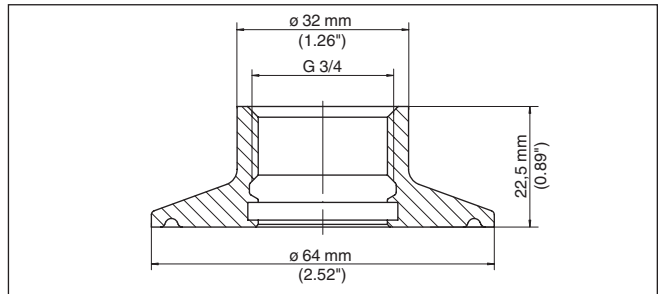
Dimensions of threaded adapter G $\frac{3}{4}$ (DIN 3852-X) on Clamp 2" (DIN 32676, ISO 2852) PN 16
